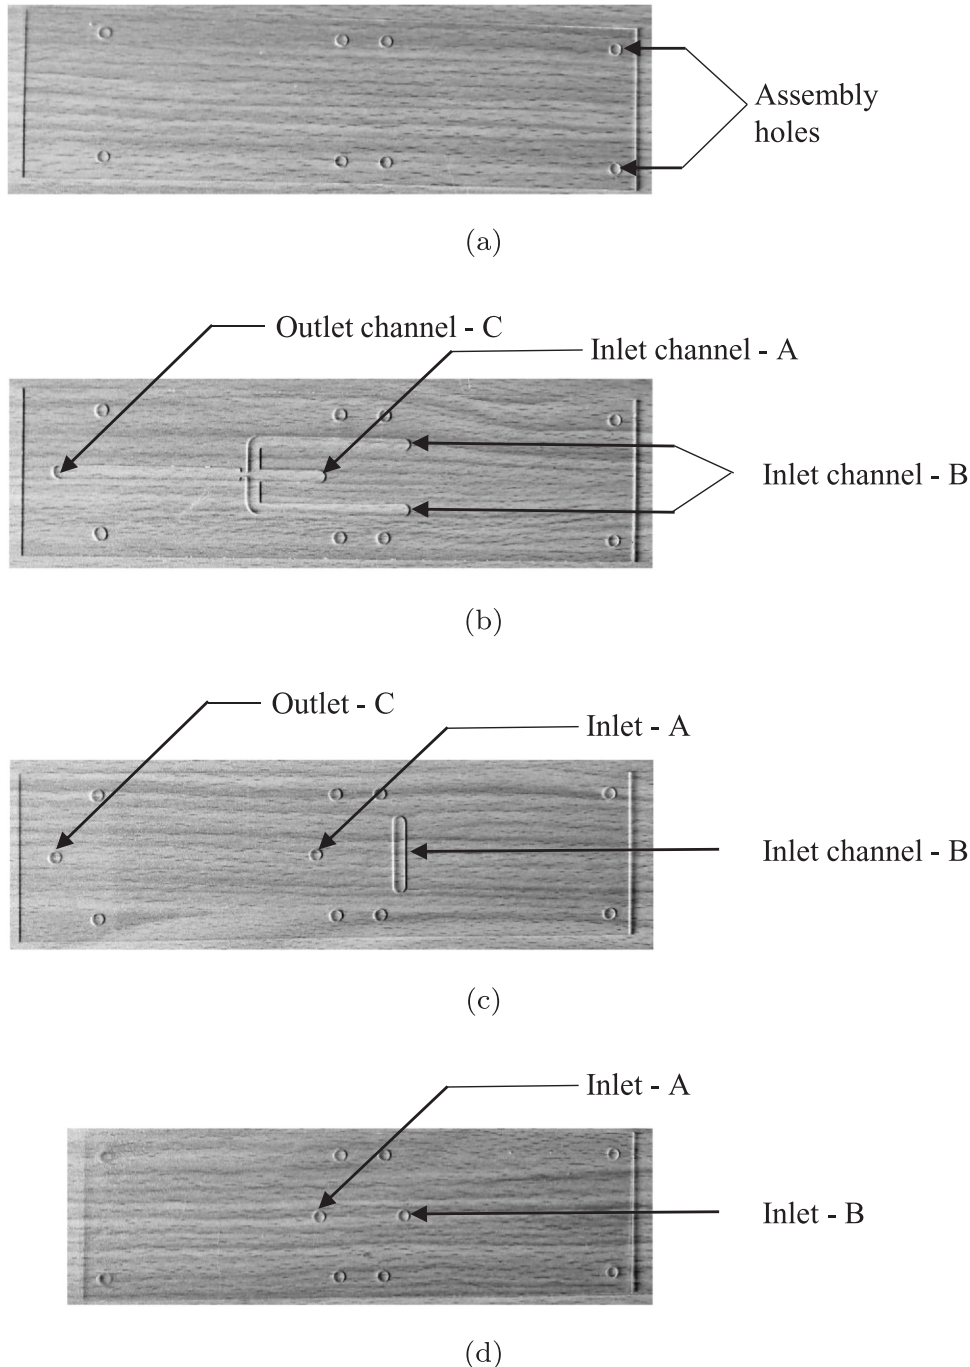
PMMA layers fabricated using laser cutting technology: (a) Layer 1; (b) Layer 2; (c) Layer 3; (d) Layer 4.
